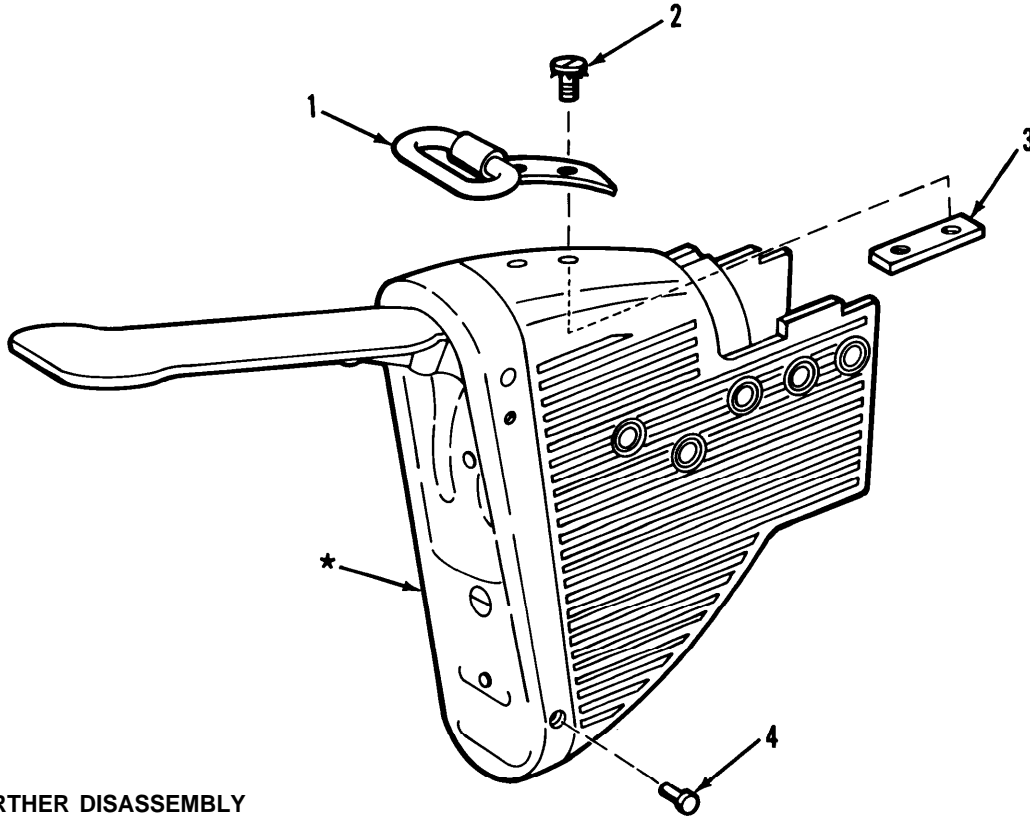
Machine gun, 7.62-mm M60 and M60D (M60D minor components).
